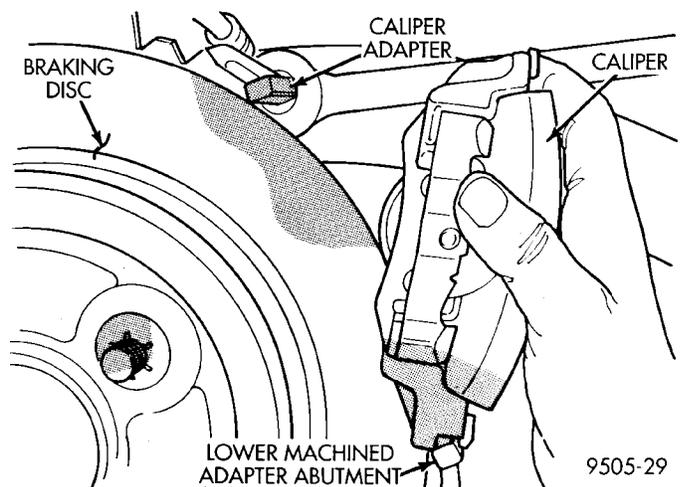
Removing/Installing Caliper Assembly From Adapter
